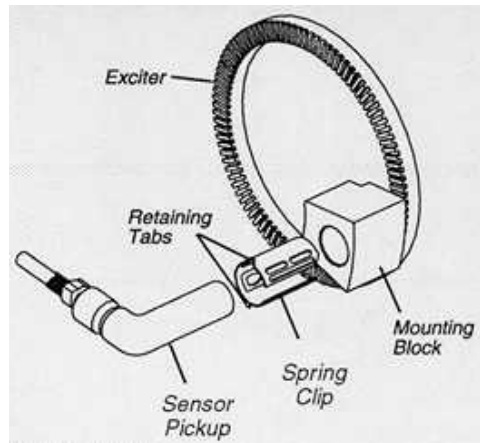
Wheel speed sensor and toothed wheel [2]
